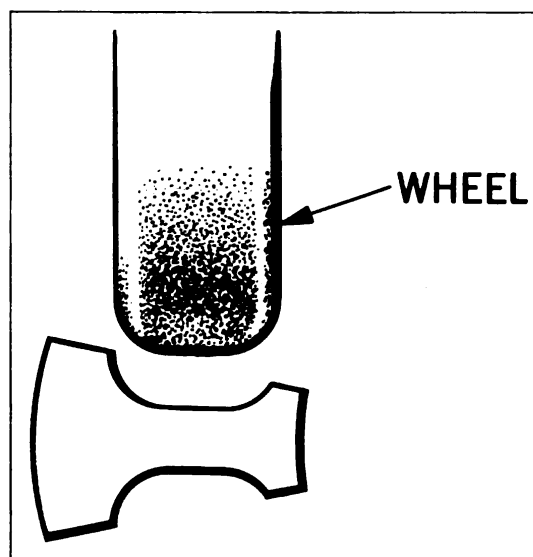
Matched form grinding requires dressing wheel to a shape that will produce the desired form on the work.
